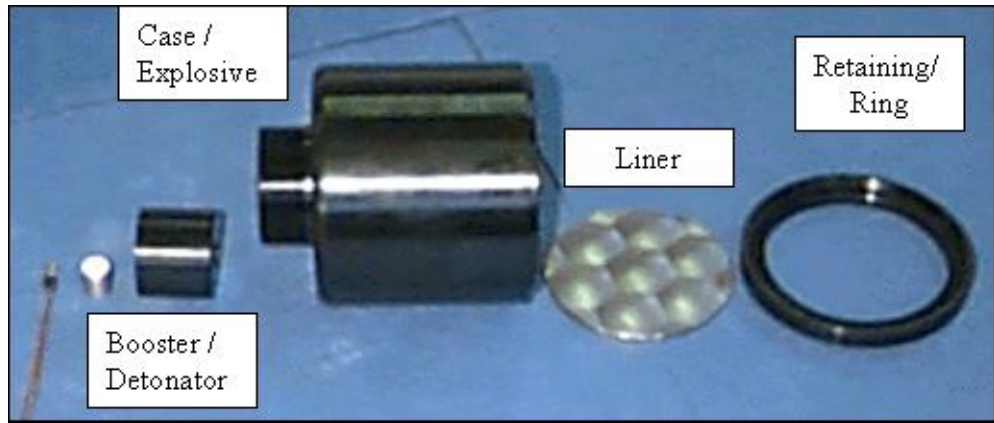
Multiple Explosively Formed Penetrator (MEFP) Warhead Hardware
